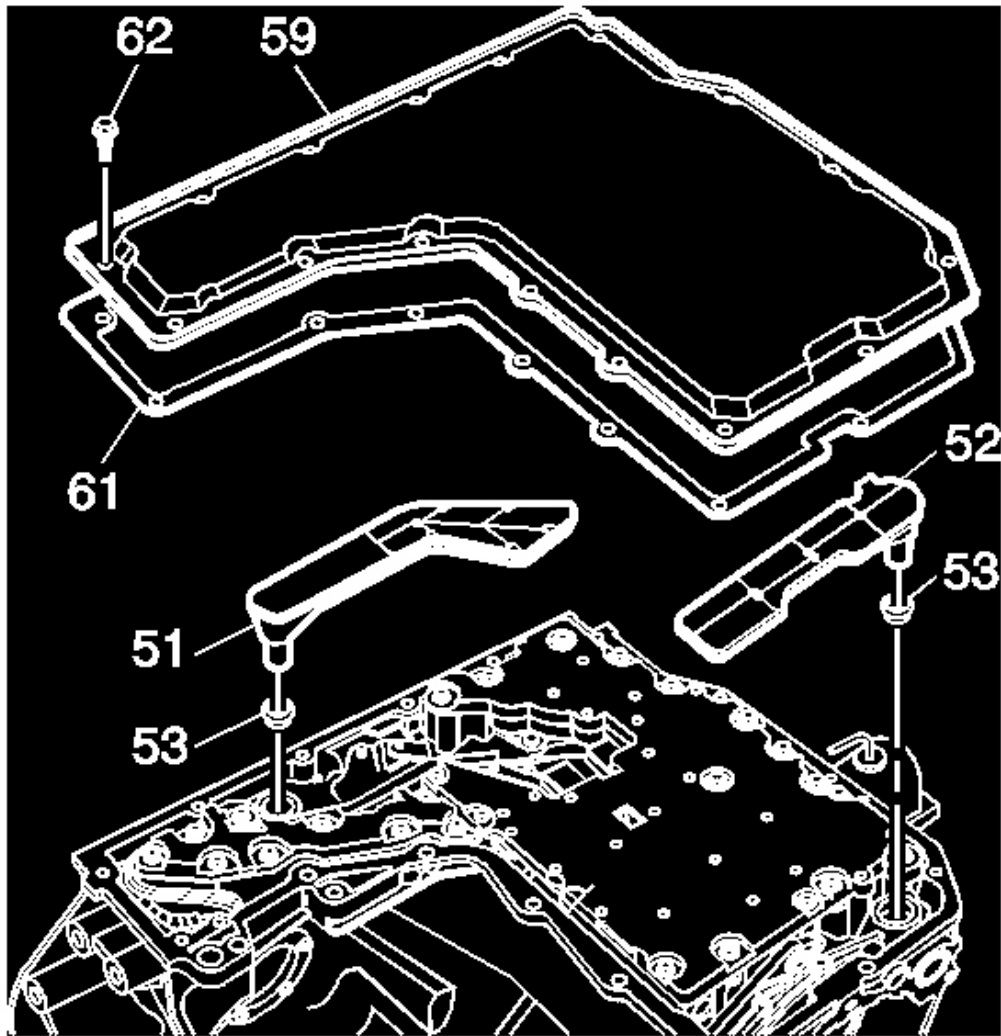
View Of Bottom Pan, Scavenge Screens & Gasket
